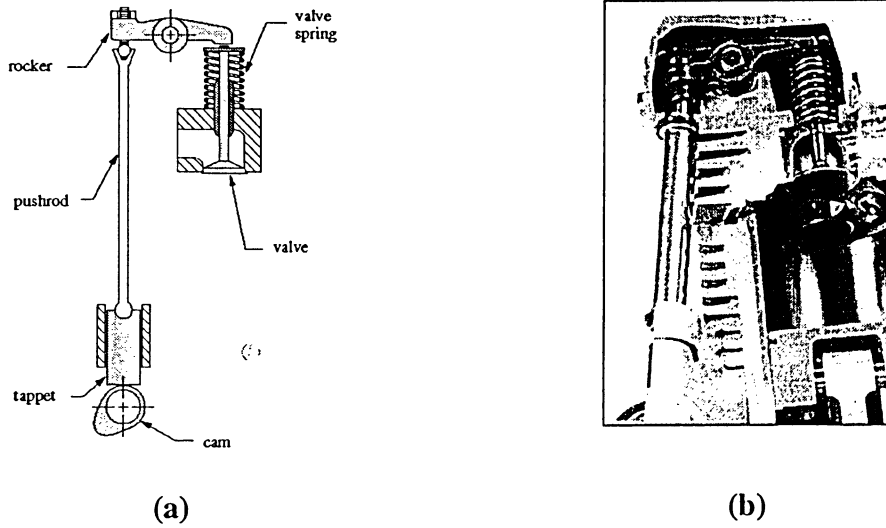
Schematic of the cam system (a) and cut-away view of a Saito cam system, showing the push rod, rocker arm, spring, valve, cooling fins, inner cylinder wall, piston cross section, wrist pin and connecting rod (b).
